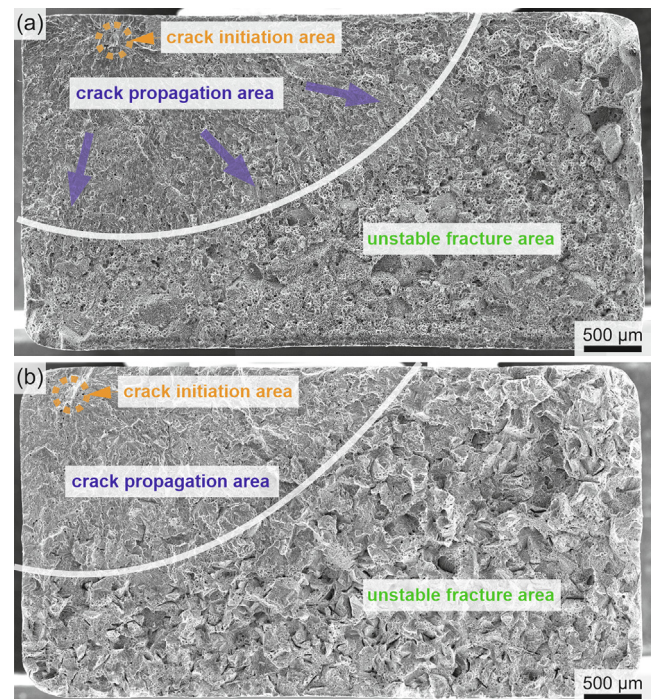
The topography of typical fracture surface of HCF failure of the MIM Ti-Nb-Zr produced by (a) clean sintering and (b) polluted sintering.
